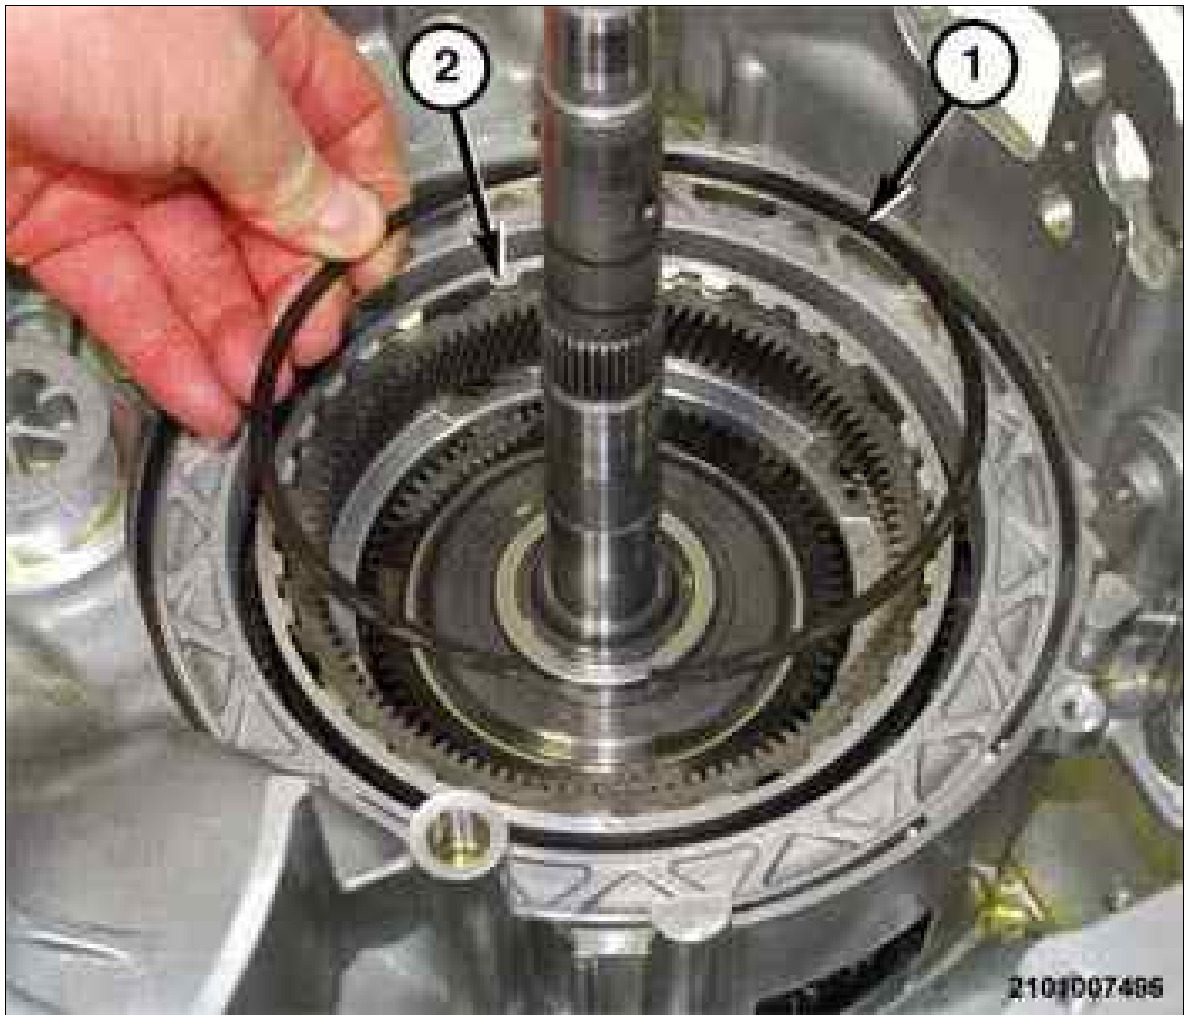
Annulus Gear 3 & Carrier Gear 1&2
